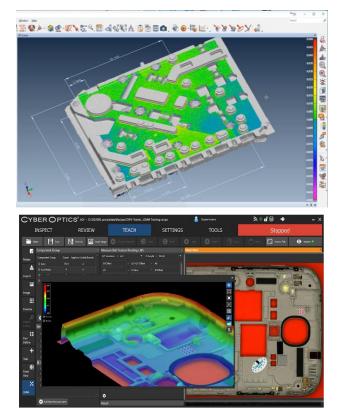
and 15. From cell phone cases and frames, various machined and molded parts, to socket metrology, MRS technology can acquire highly precise measurements at a much faster speed than alternate technologies.
